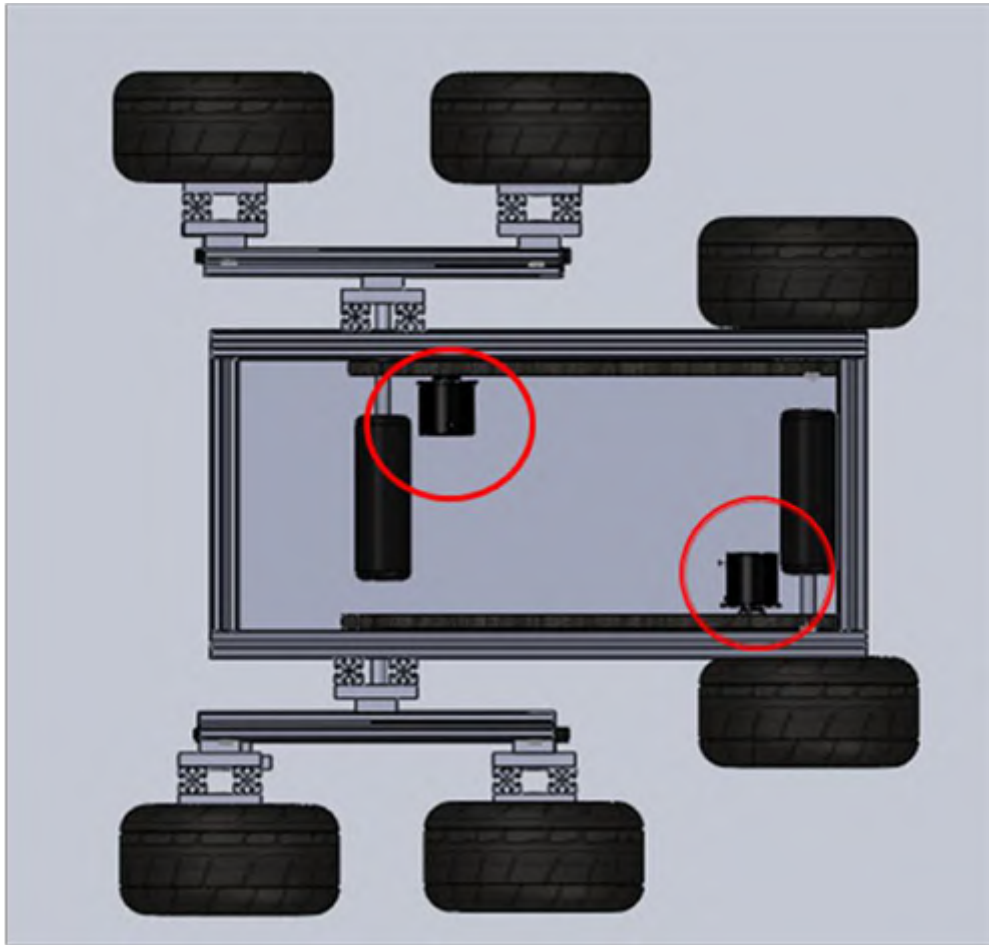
, Encoder sensor position located in the fixed wheels in rear robot part.
